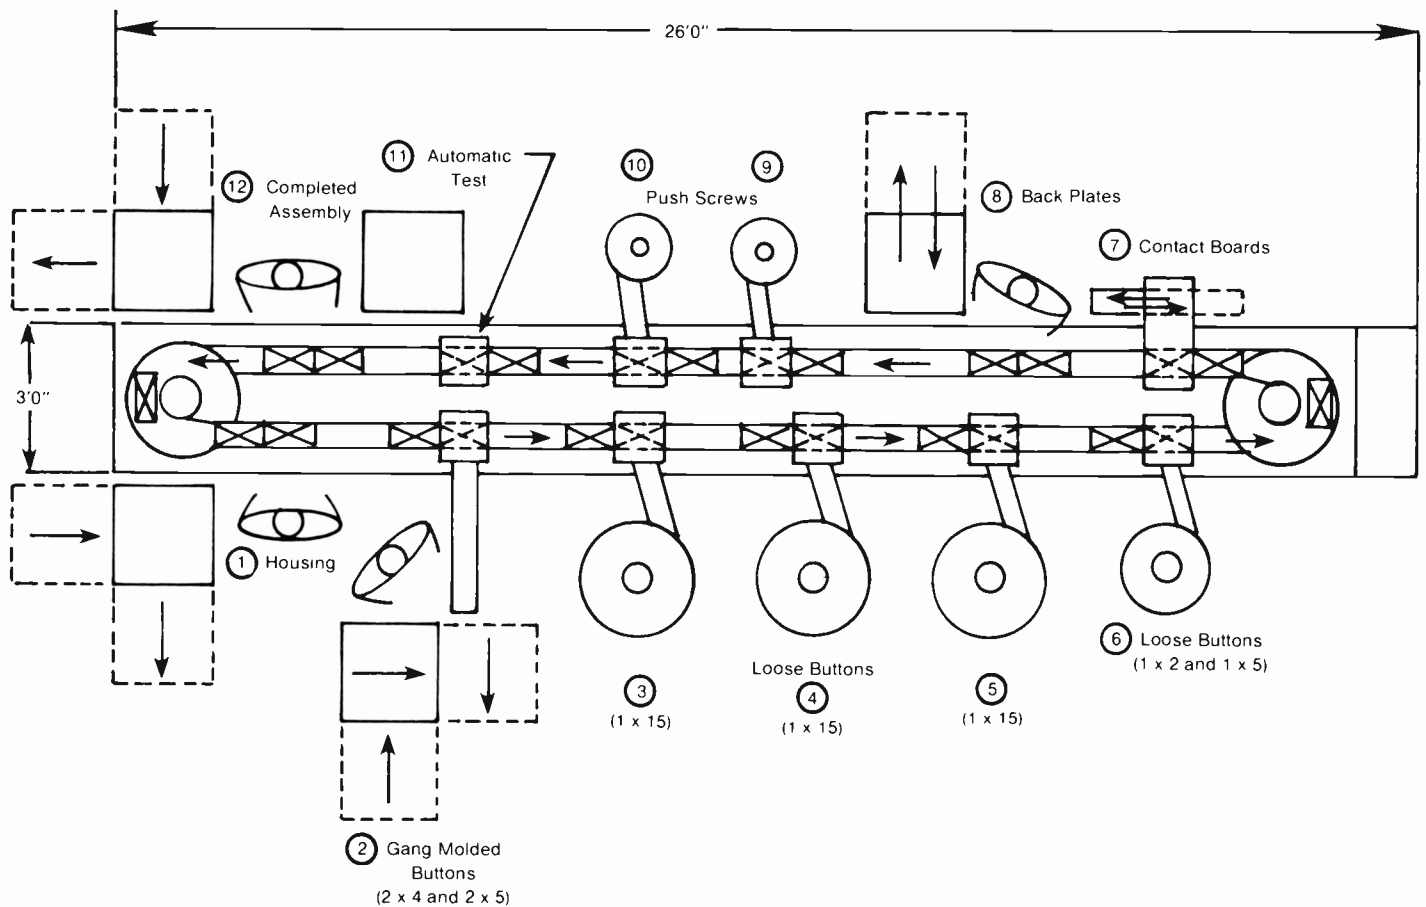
Switch-assembly machine. The floor-plan layout shows the automatic assembly stations intermixed with manual assembly stations.
